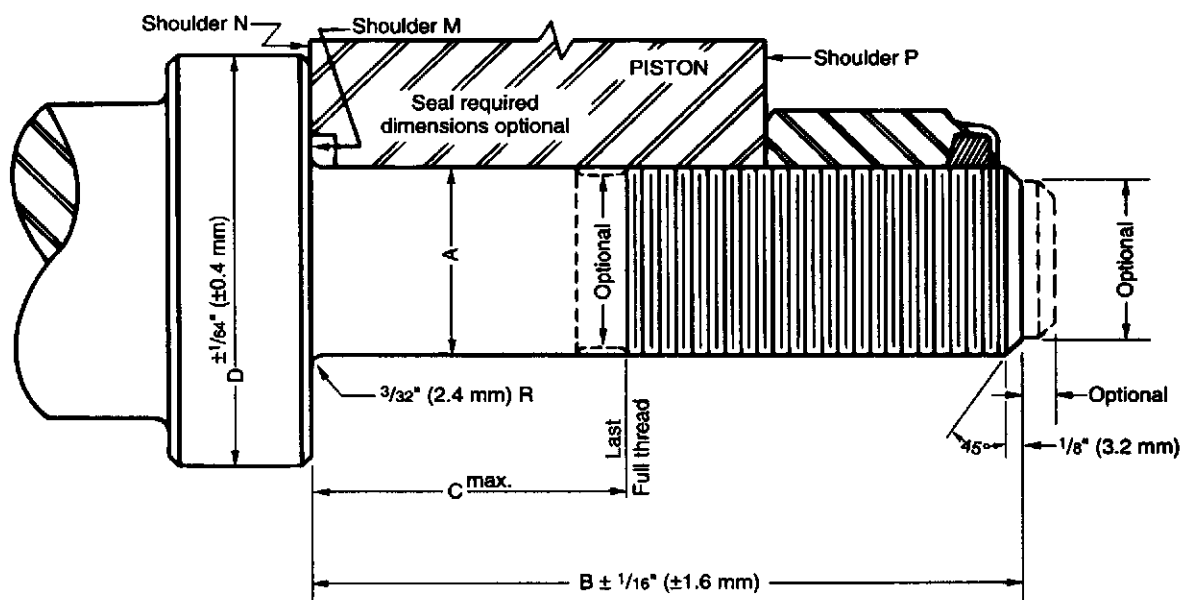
Fluid End of Single Acting Slush Pump Piston Rod and Piston Body Bore
